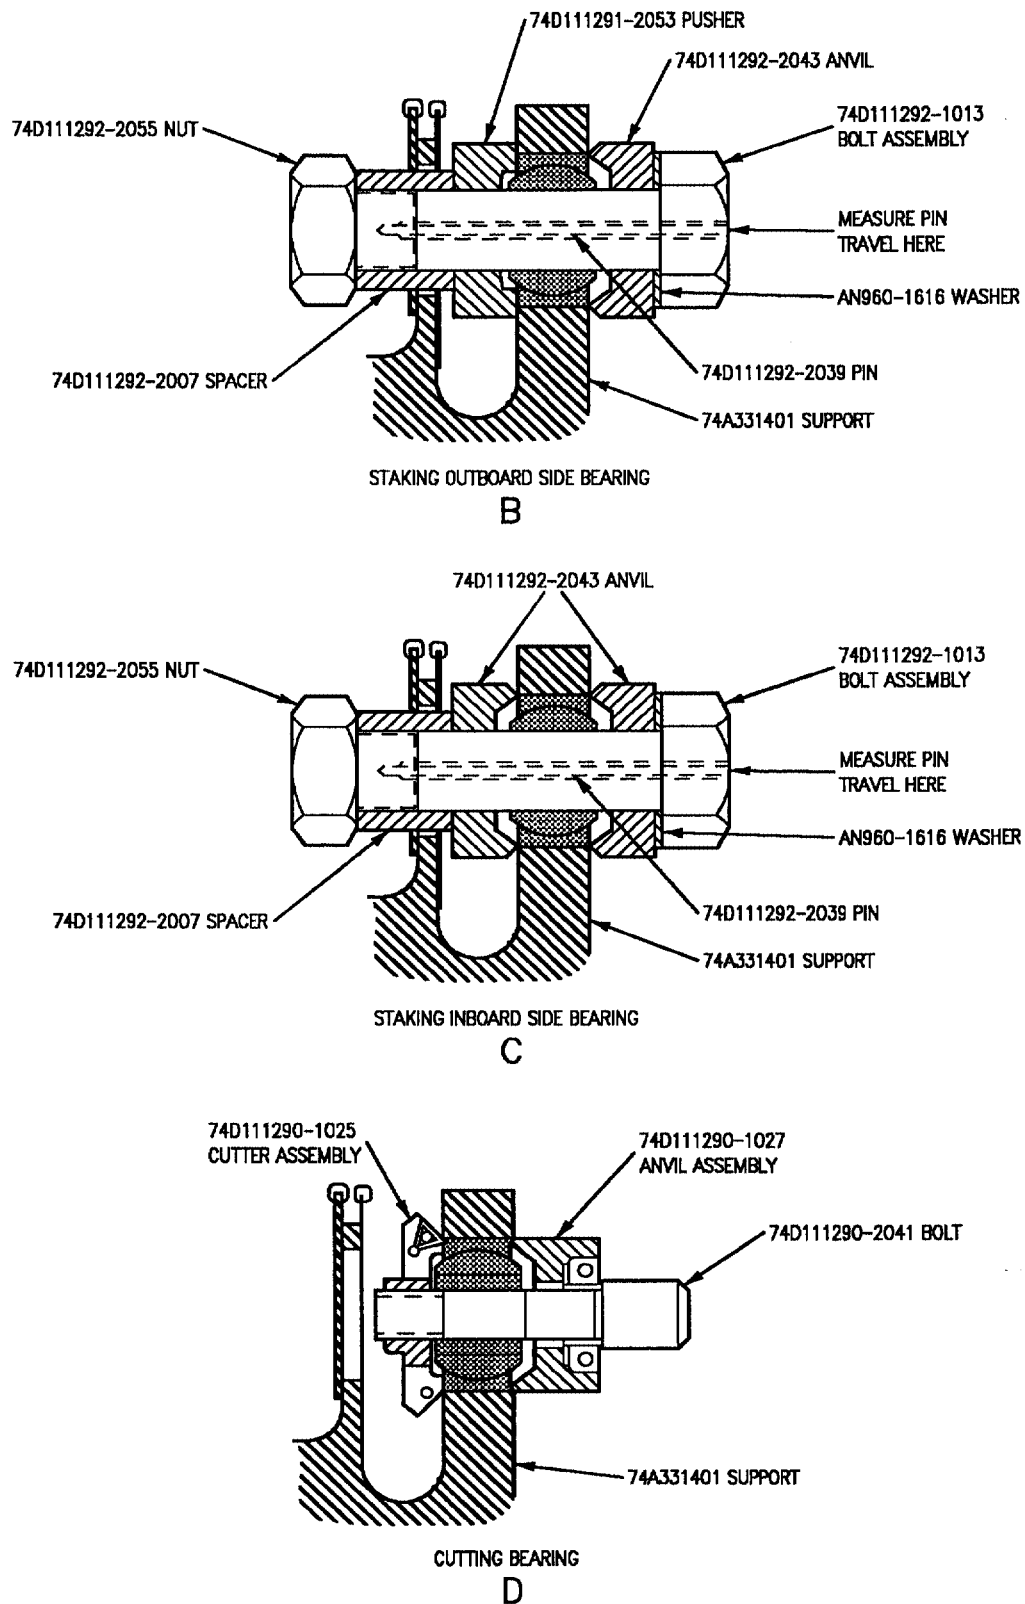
Support 74A331401, Bearing MS14101 Repair (Sheet 2)
